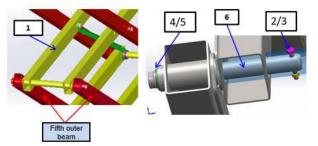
Sixth fork assembly 1. Sixth inner arm assembly 2. Bolt 3. Nut 4.
